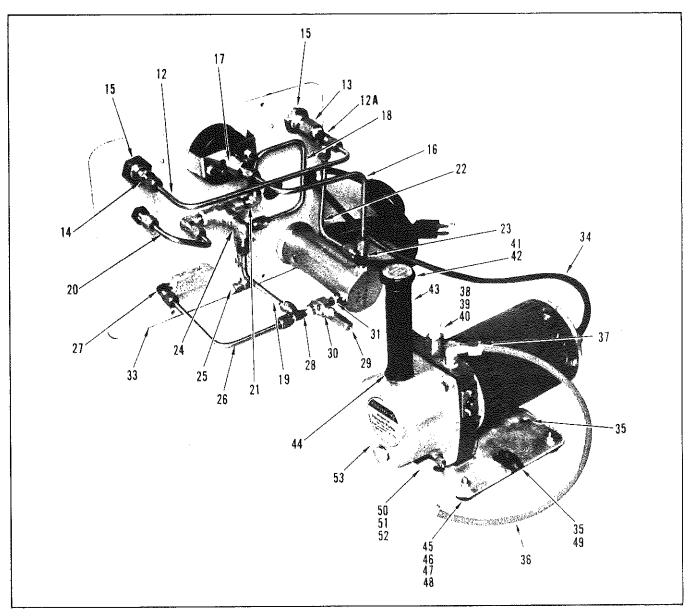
Vacuum Pump Case Assembly, Part No. 3657-51-1 (Sheet 2 of 2)
